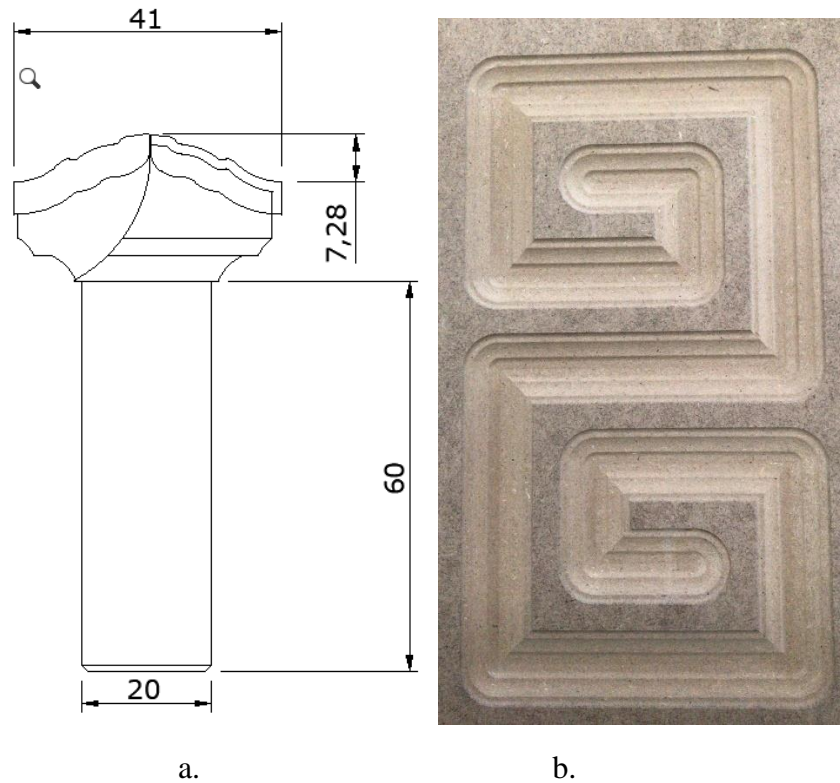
a. Profile tool geometry b. machined surface of MDF
